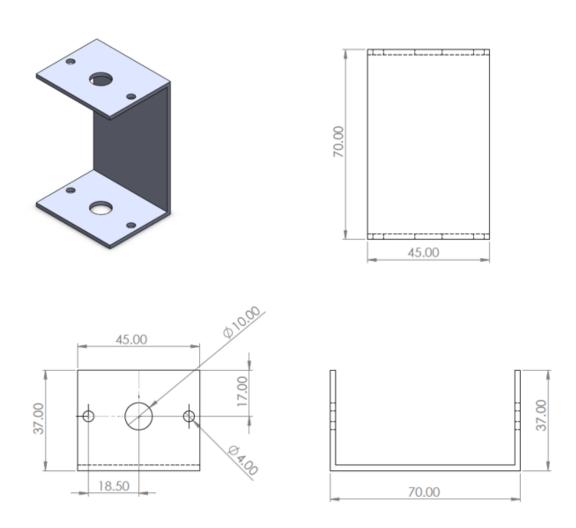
CAD model and dimensions of Arm 2 worm gear shaft suport bracket
